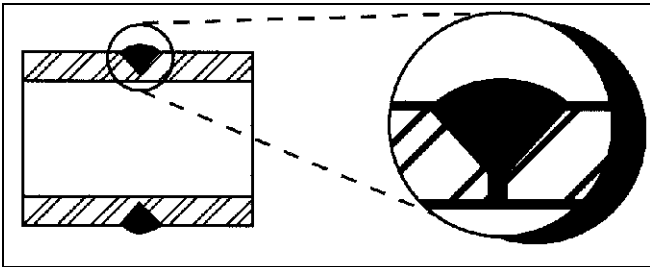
Pipe weld with incomplete penetration — severe crevice
